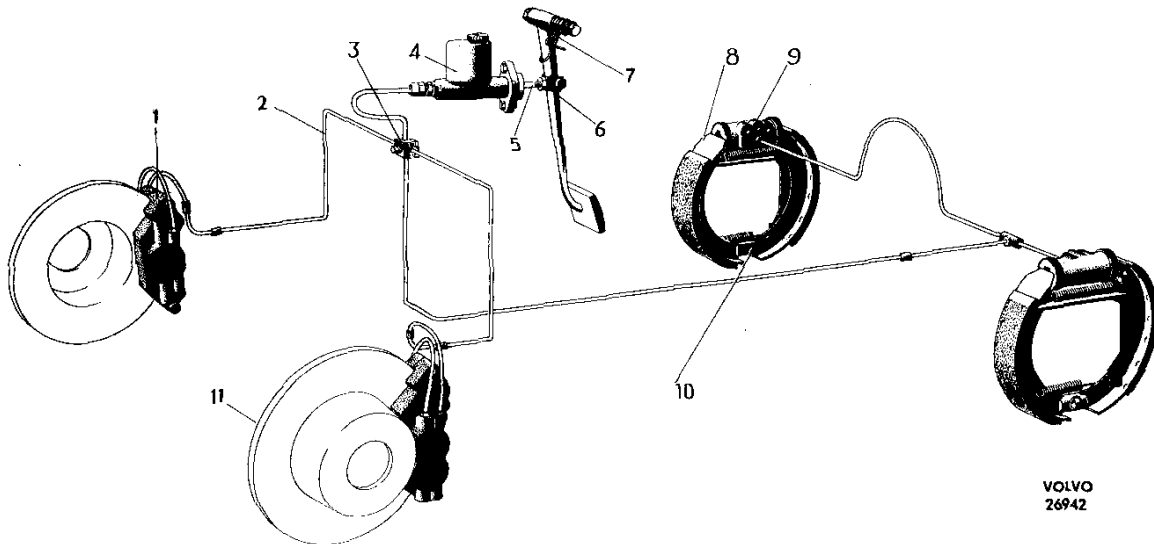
Foot brake system, vehicle with front wheel disc brakes.
